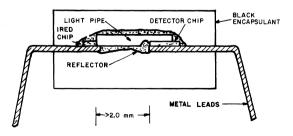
Cutaway view of General Electric H11AV: 6 pin DIP Optoisolator approved to VDE Safety Standard 0883/6.80, with testing to 0730/6.76 and 0860/11.76.
